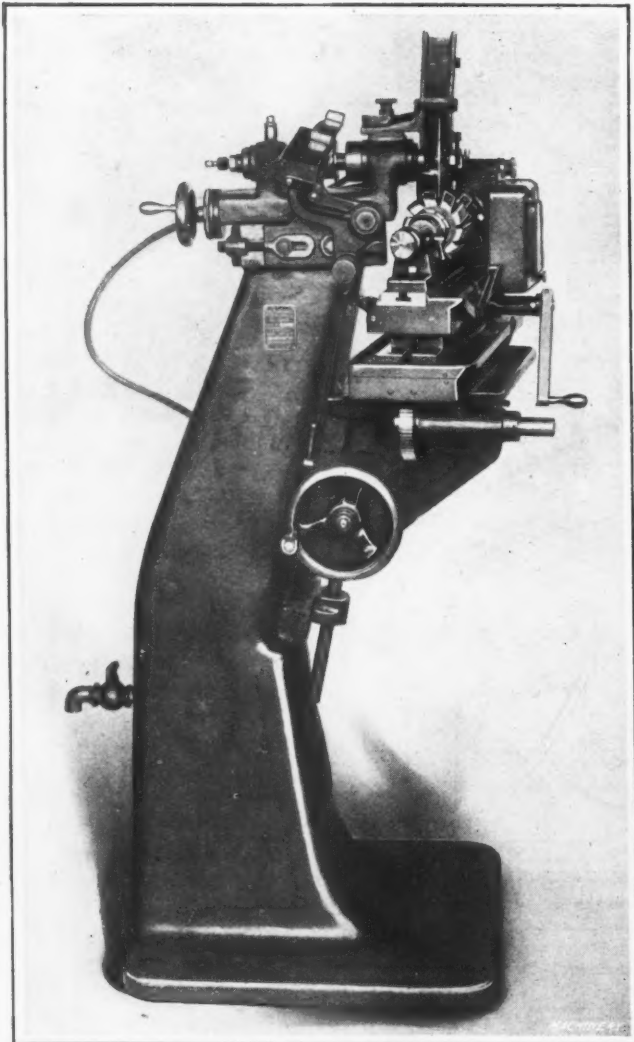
Side View of Cutter Grinding Machine, showing how the Table is moved Parallel to the Face of the Conical Wheel
